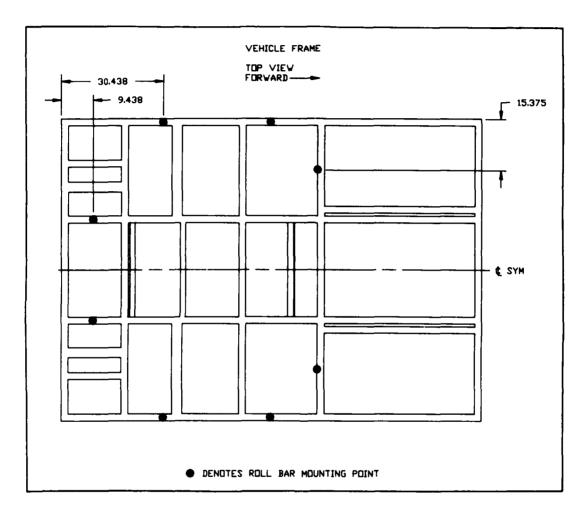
Parascension Cart, Roll Cage Mounting Points.
